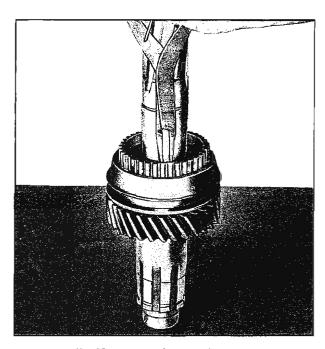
A-23 Removing 1-2 Speed Synchronizer Clutch Assy. Retainer Snap Ring
